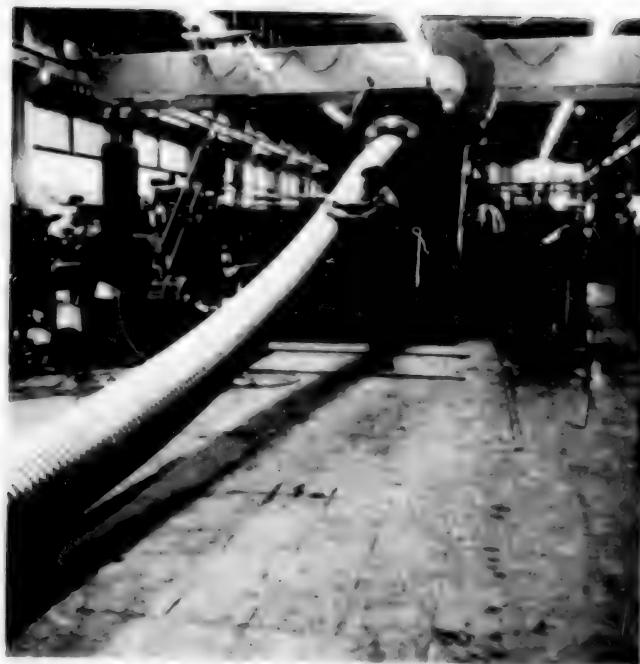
Continuous production process to manufacture the flexible SF<sub>6</sub> tubular gas cable. The conductor, with the disk insulators set up on it, slides into the cable sheath, which is subsequently rounded, welded, and corrugated.
